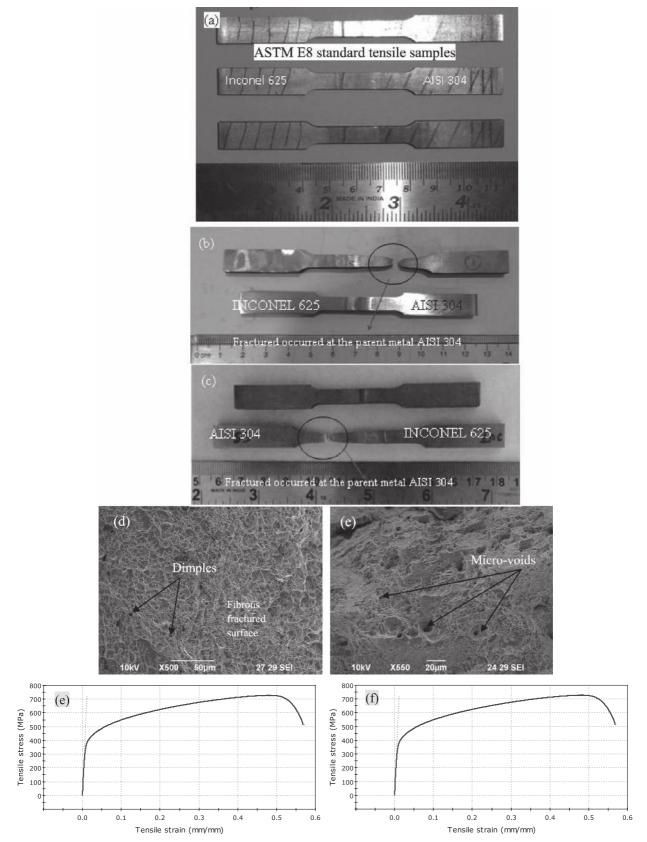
(a) ASTM E8 standard tensile samples (b) Fractured tensile sample of GTA weldments (c) Fractured tensile sample of PCGTA weldments; SEM fractographs of (d) GTA weldments (e) PCGTA weldments; Stress-strain curves of the Inconel 625 and AISI 304 (e) GTA weldments (f) PCGTA weldments.
